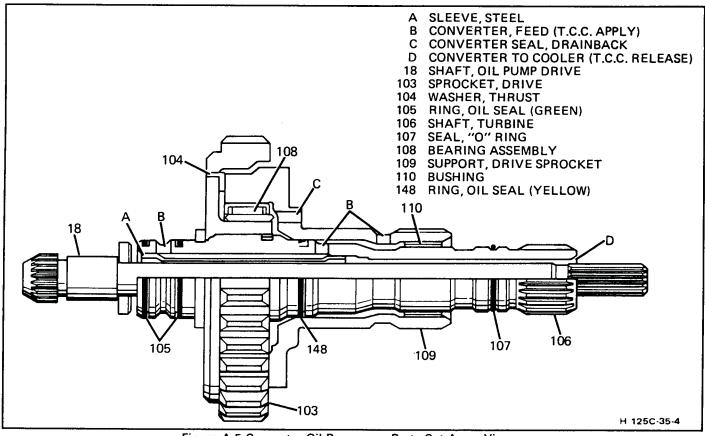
Converter Oil Passages - Parts Cut-Away View
